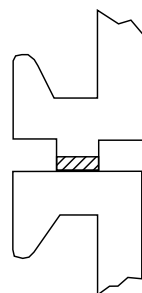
, a tongue and groove design with grip tabs, is the ideal vibration welding joint. It securely holds the flange in the tooling, aligns the mating parts to each other before welding, applies the weld force directly over the weld area, and hides flash both internally and externally. The grip tab need not be continuous. A raised tongue is provided on one part to provide material to melt and flow in the joint during vibration. In reality, material is displaced from both parts during welding, but convention usually adds weld material only to the tongue.
